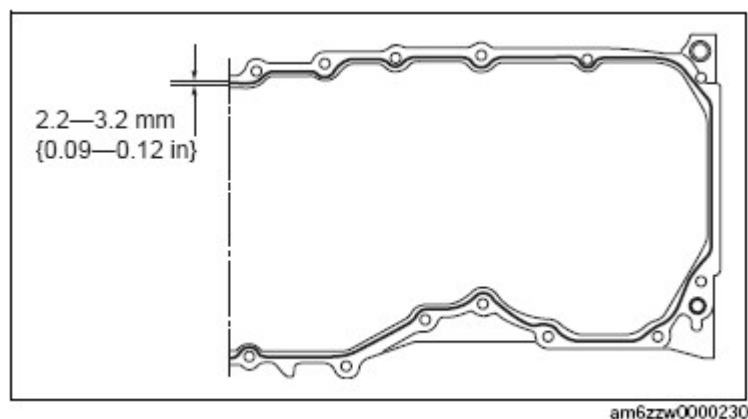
Applying Continuous Bead Of Silicone Sealant To Oil Pan
